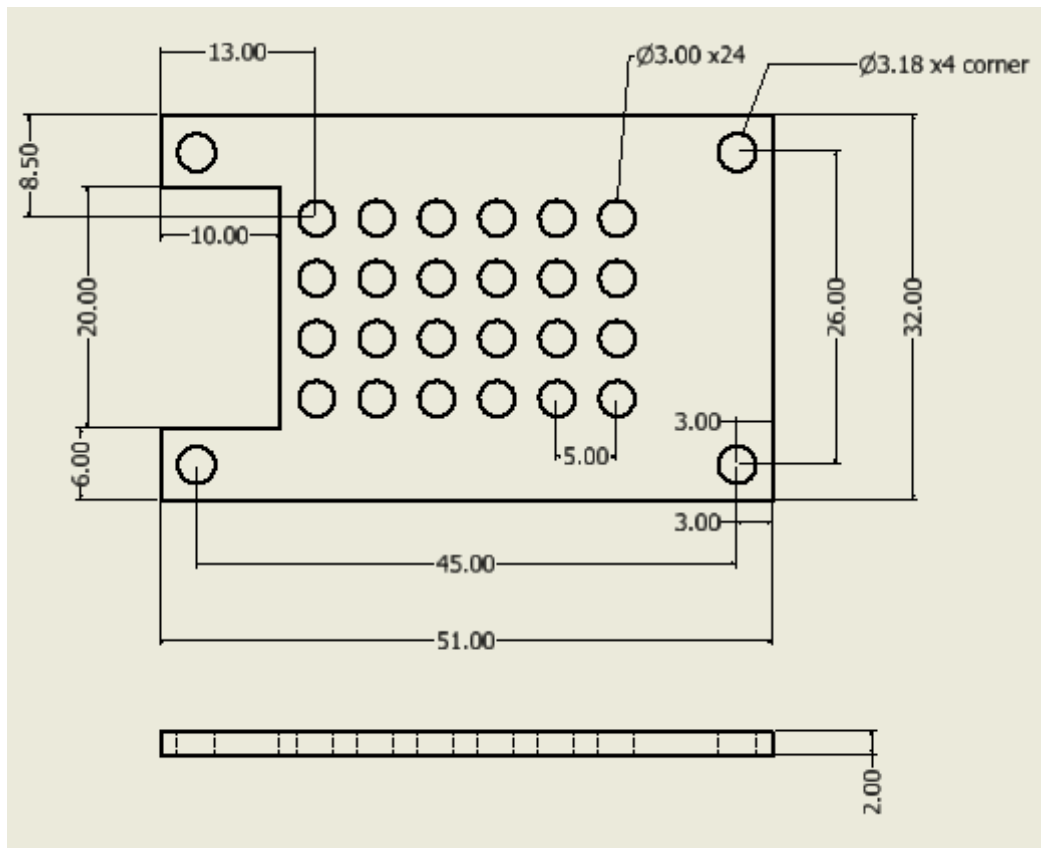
A dimensioned sketch for the design of the laser scanner compression tool
